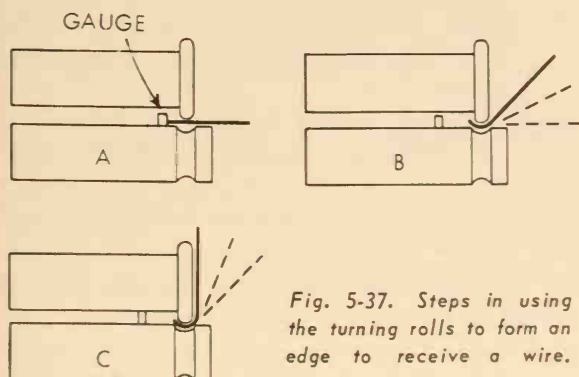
Steps in using the turning rolls to form an edge to receive a wire.
